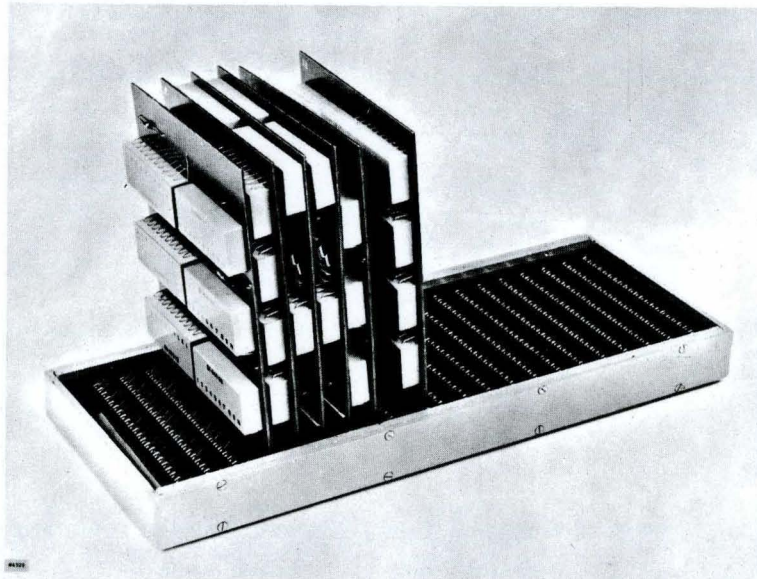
Assembly of contact blocks in a frame with some printed-wiring boards inserted.
